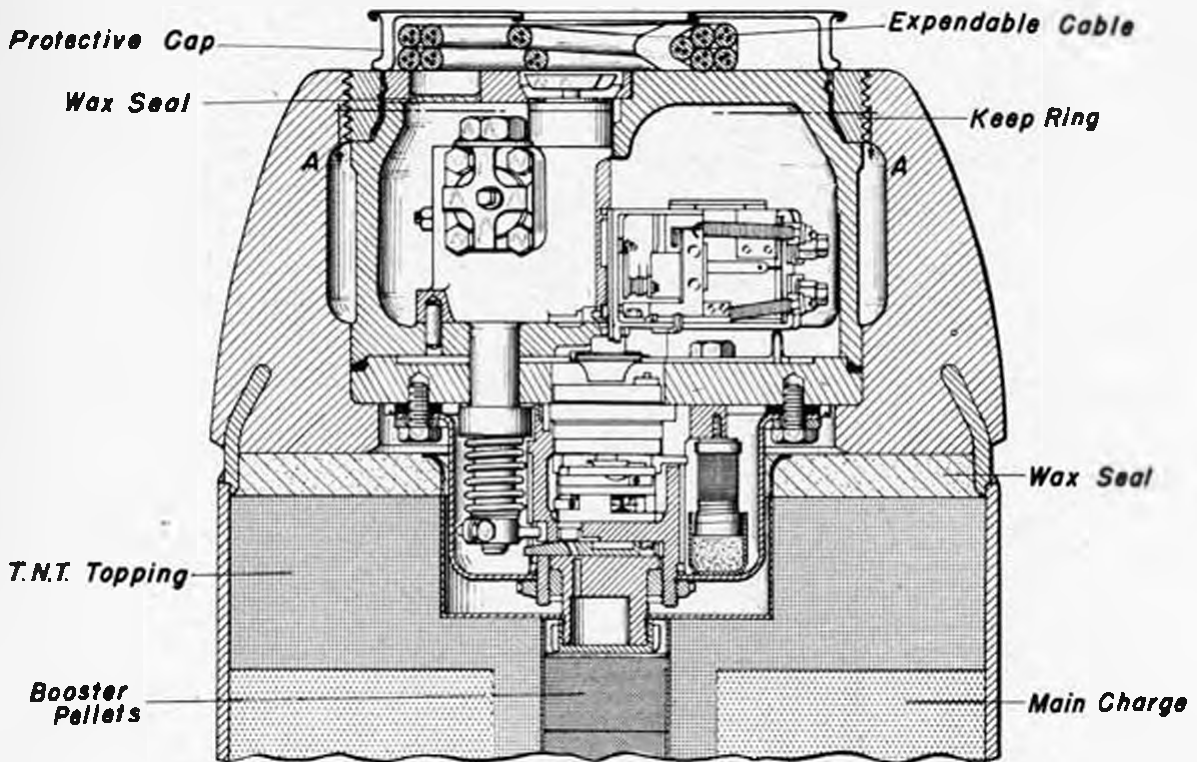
Fuze, Squid, Mark I, Sectional View
